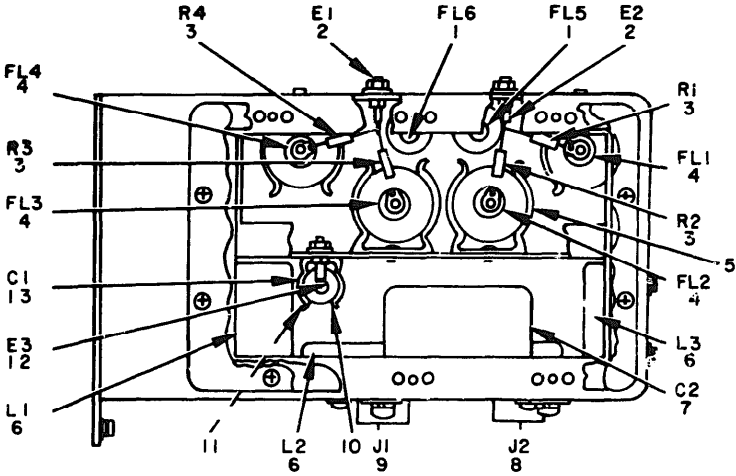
① Panel assembly, control, unit 2 (Sheet 1 of 2).
